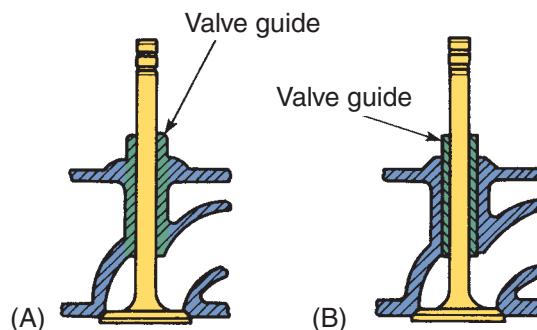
(A) Integral and (B) removable valve guides.
